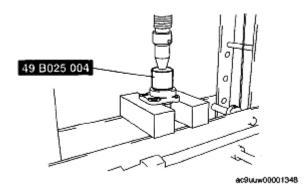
Pressing Dust Seal (Axle Side) With SST Courtesy of MAZDA MOTORS CORP.
